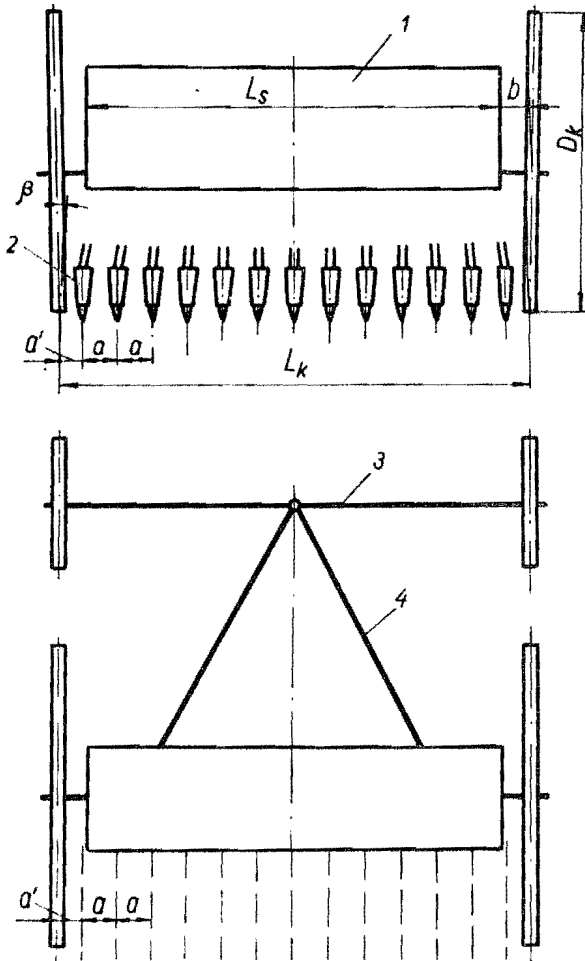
Schematic diagram of a horse-drawn grain drill with the forecarriage: 1—box; 2—furrow openers; 3—front wheel axle; 4—brace.
